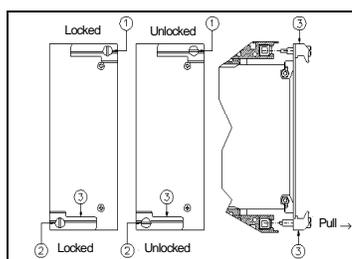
Latch Mechanism for Removal of Relay from Case
